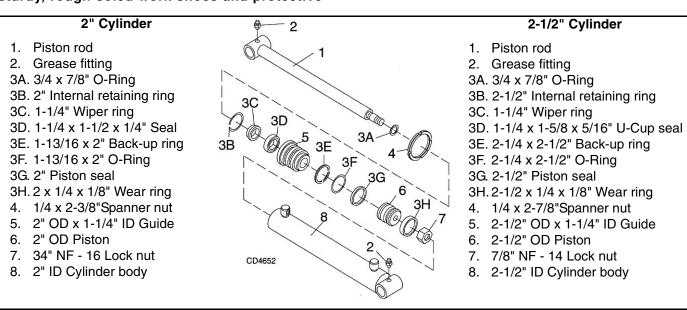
Spanner Nut Type Hydraulic Cylinder Assemblies
